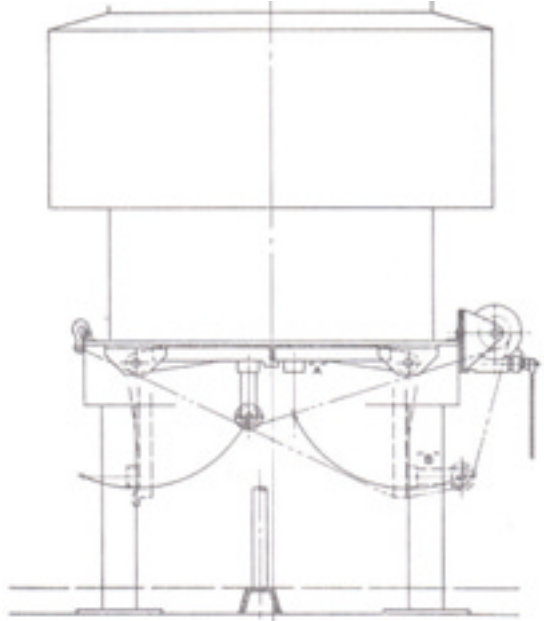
Safety hoisting device for pulling up and tightly closing cupola bottom doors.
